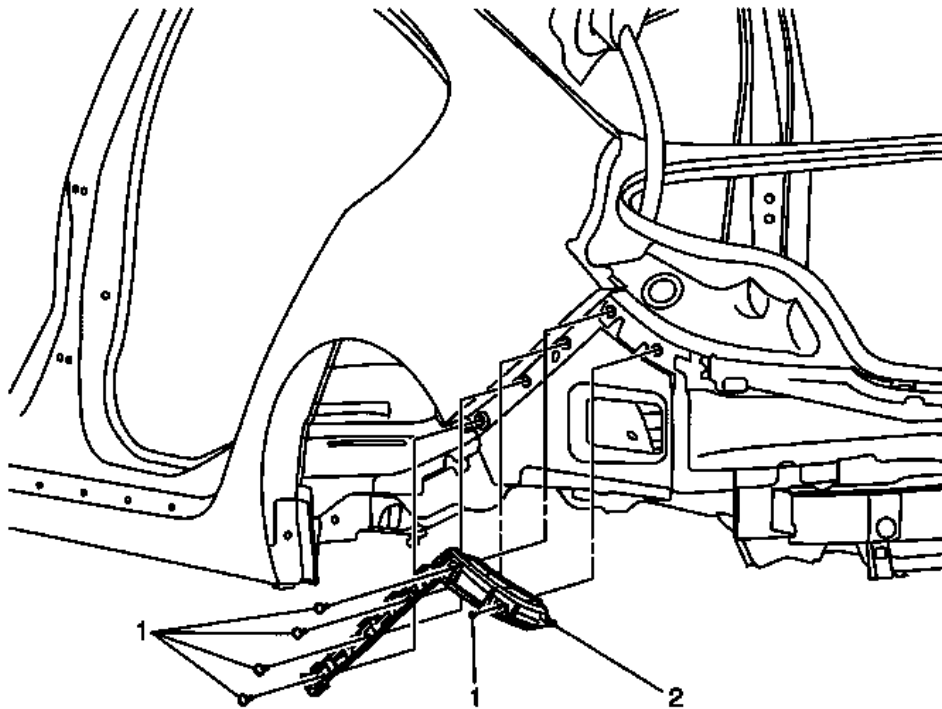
Rear Bumper Fascia Outer Guide And Rivets
